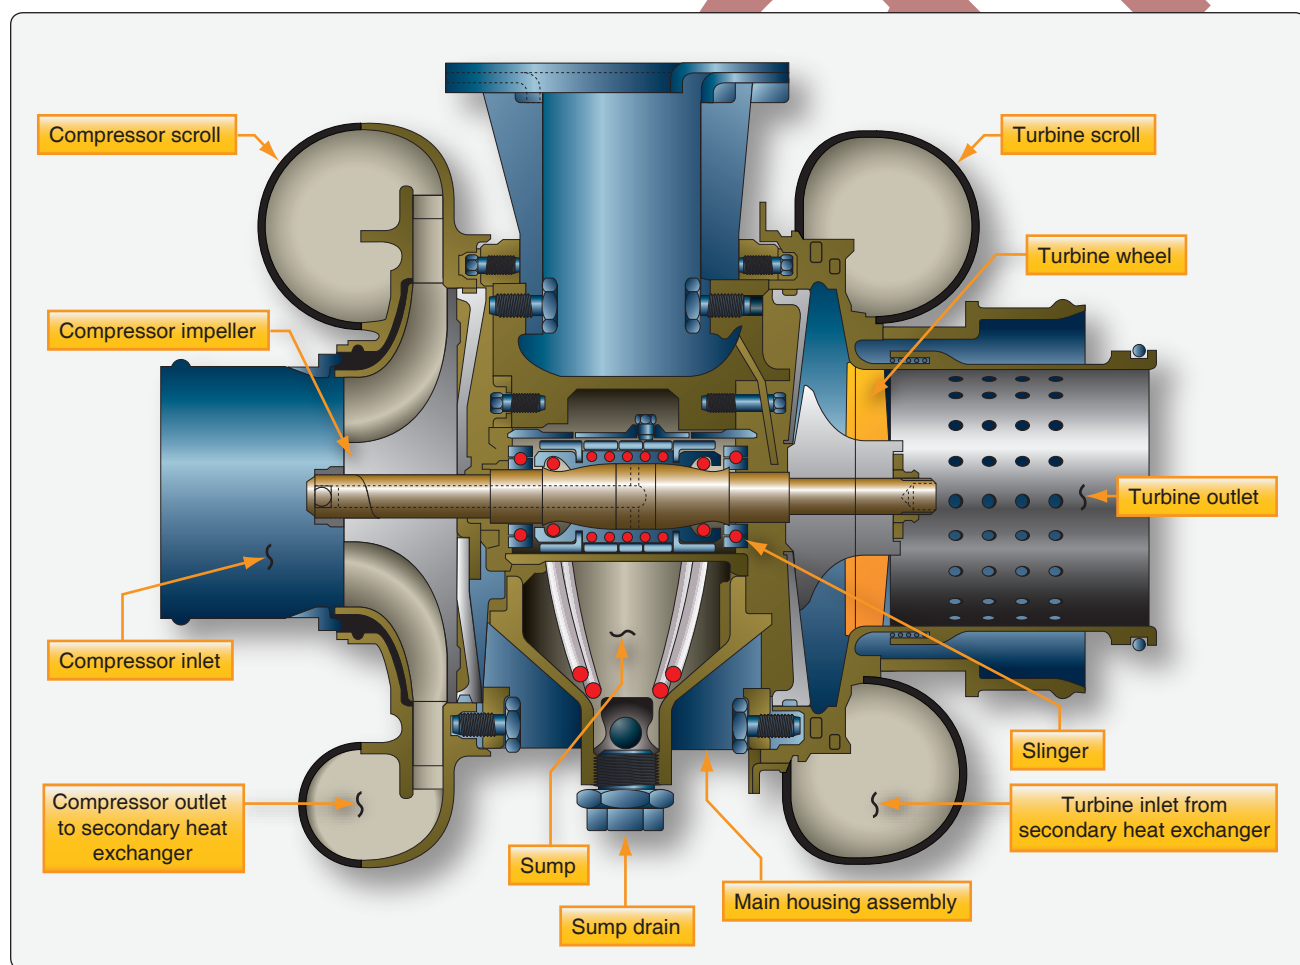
A cutaway diagram of an air cycle machine. The main housing supports the single shaft to which the compressor and turbine are attached. Oil lubricates and cools the shaft bearings.
